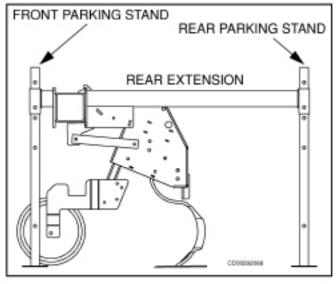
Front and Rear Parking Stands (Type F toolbar)
